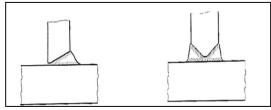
Butt welds in T-joints a) single-bevel butt weld b) double bevel butt weld
